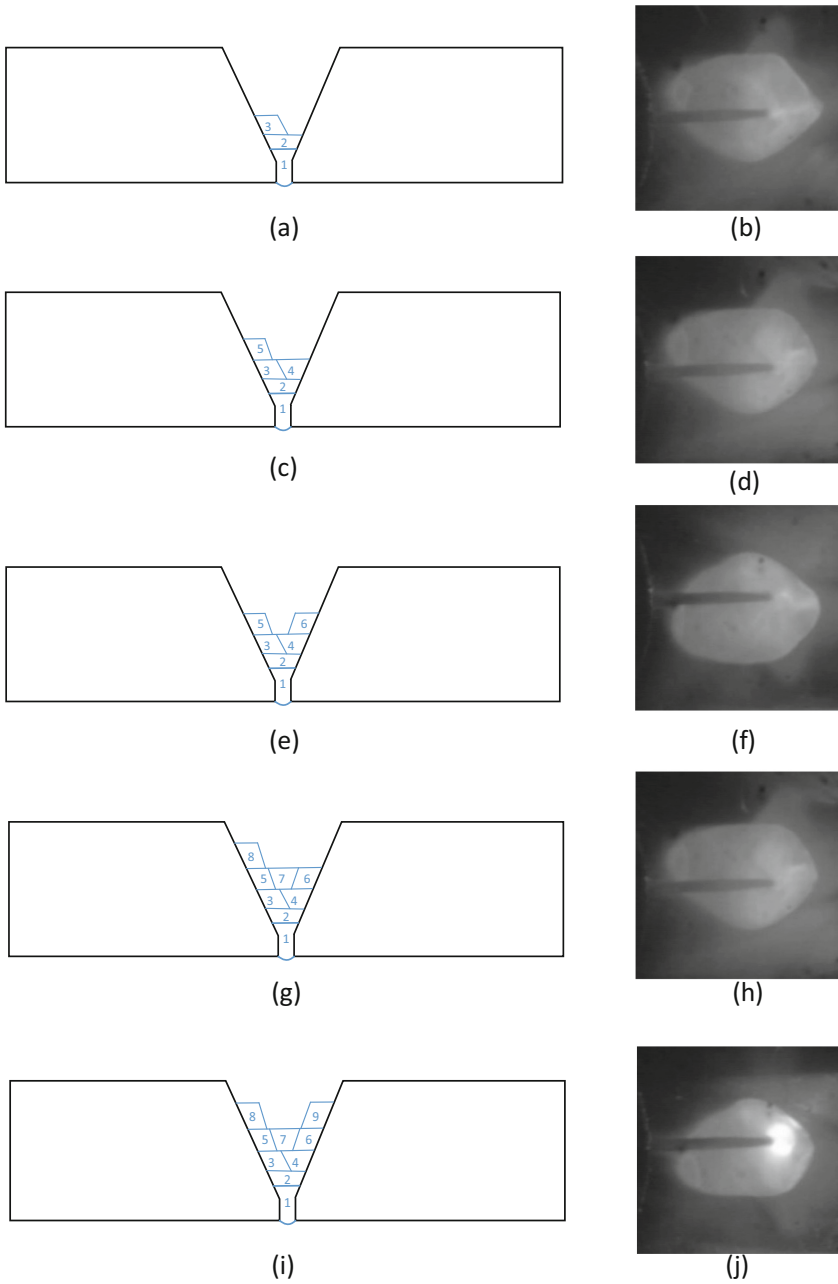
(a) (c) (e) (g) (i) Schematic diagram of weld bead filling. (b) (d) (f) (h) (j) (a) (c) (e) (g) (i) corresponding molten pool image.
